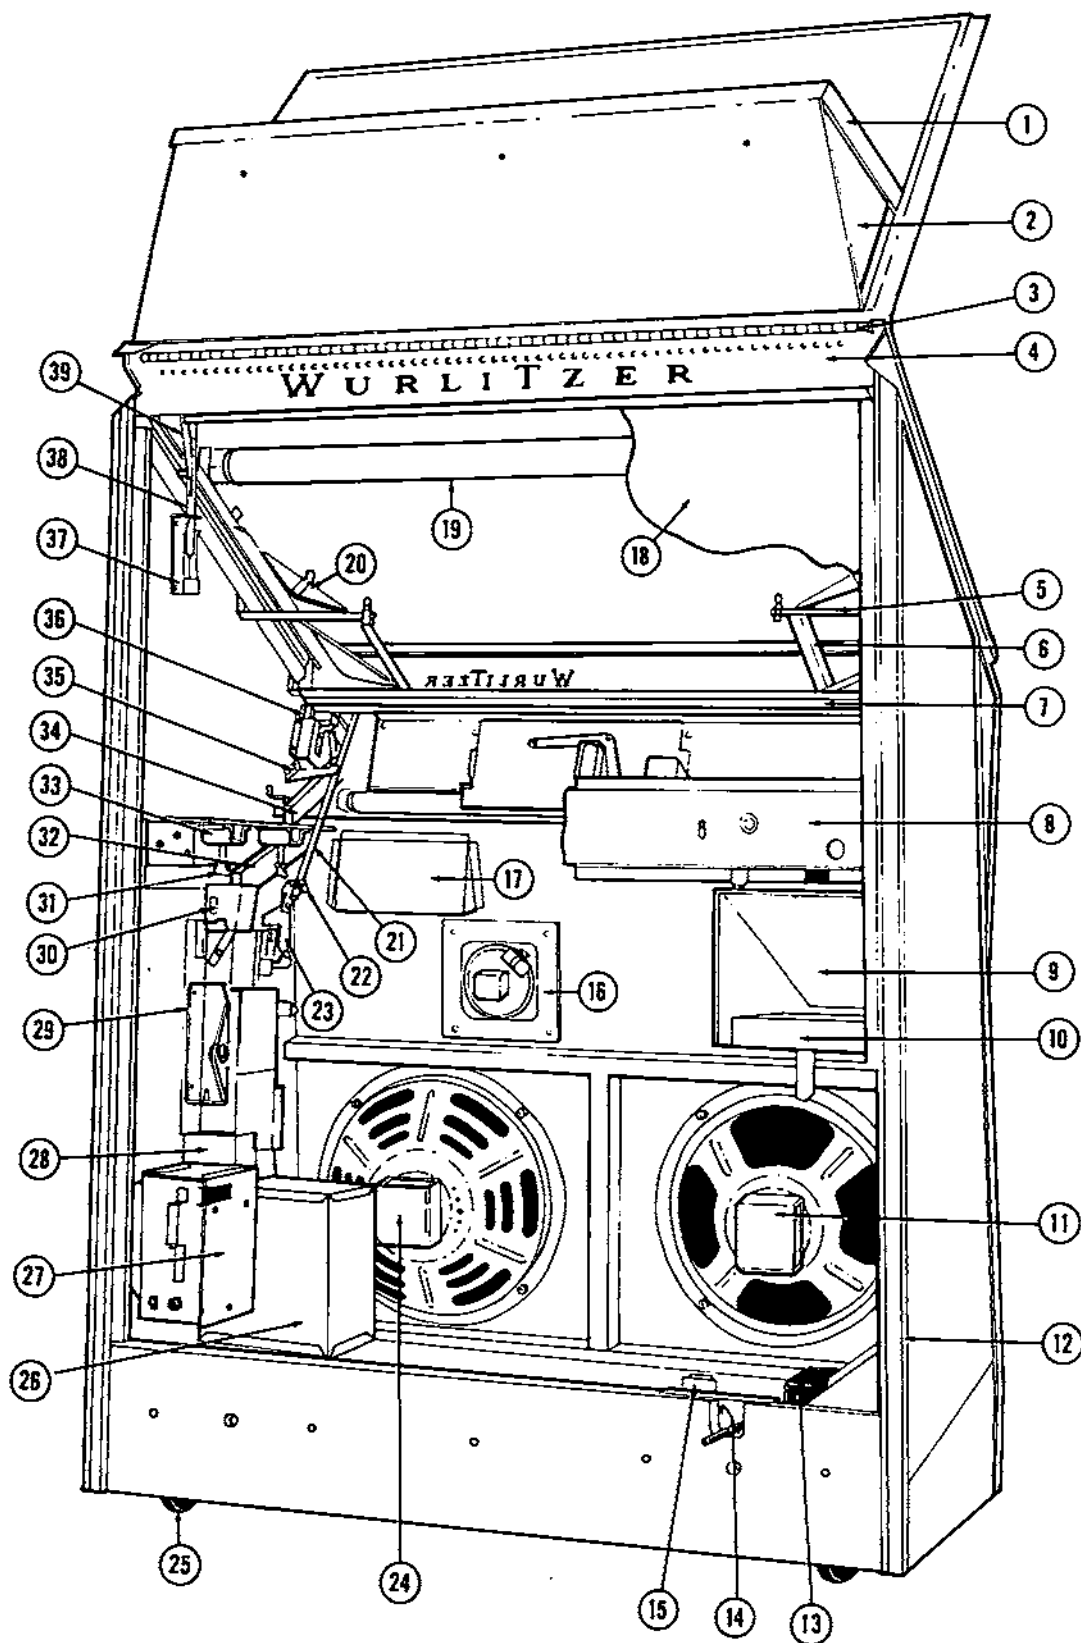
TRIM AND MOUNTING - BACK VIEW - 2600
